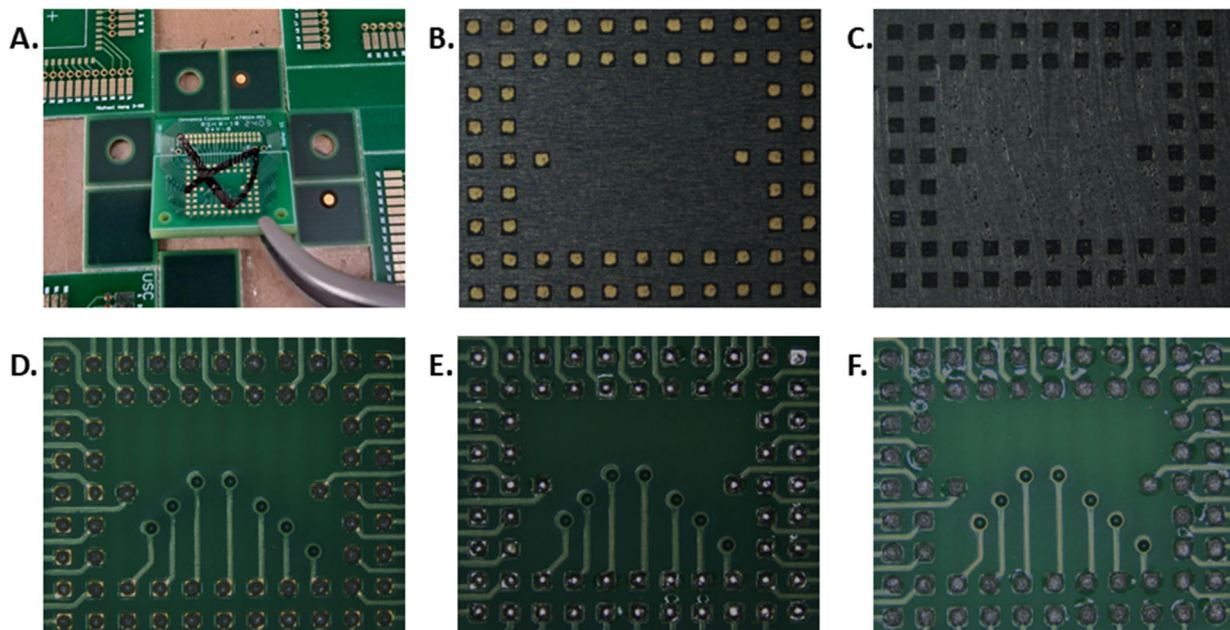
Preparation of Mother PCB. (A) PCB placed on stencil set up. (B) Mating ENIG pads through stencil. (C) Mating ENIG pads coated with solder paste through stencil. (D) Solder paste on mating pads. (E) Reflowed solder paste on mating pads. (F) 2<sup>nd</sup> layer of solder paste on mating pads.
